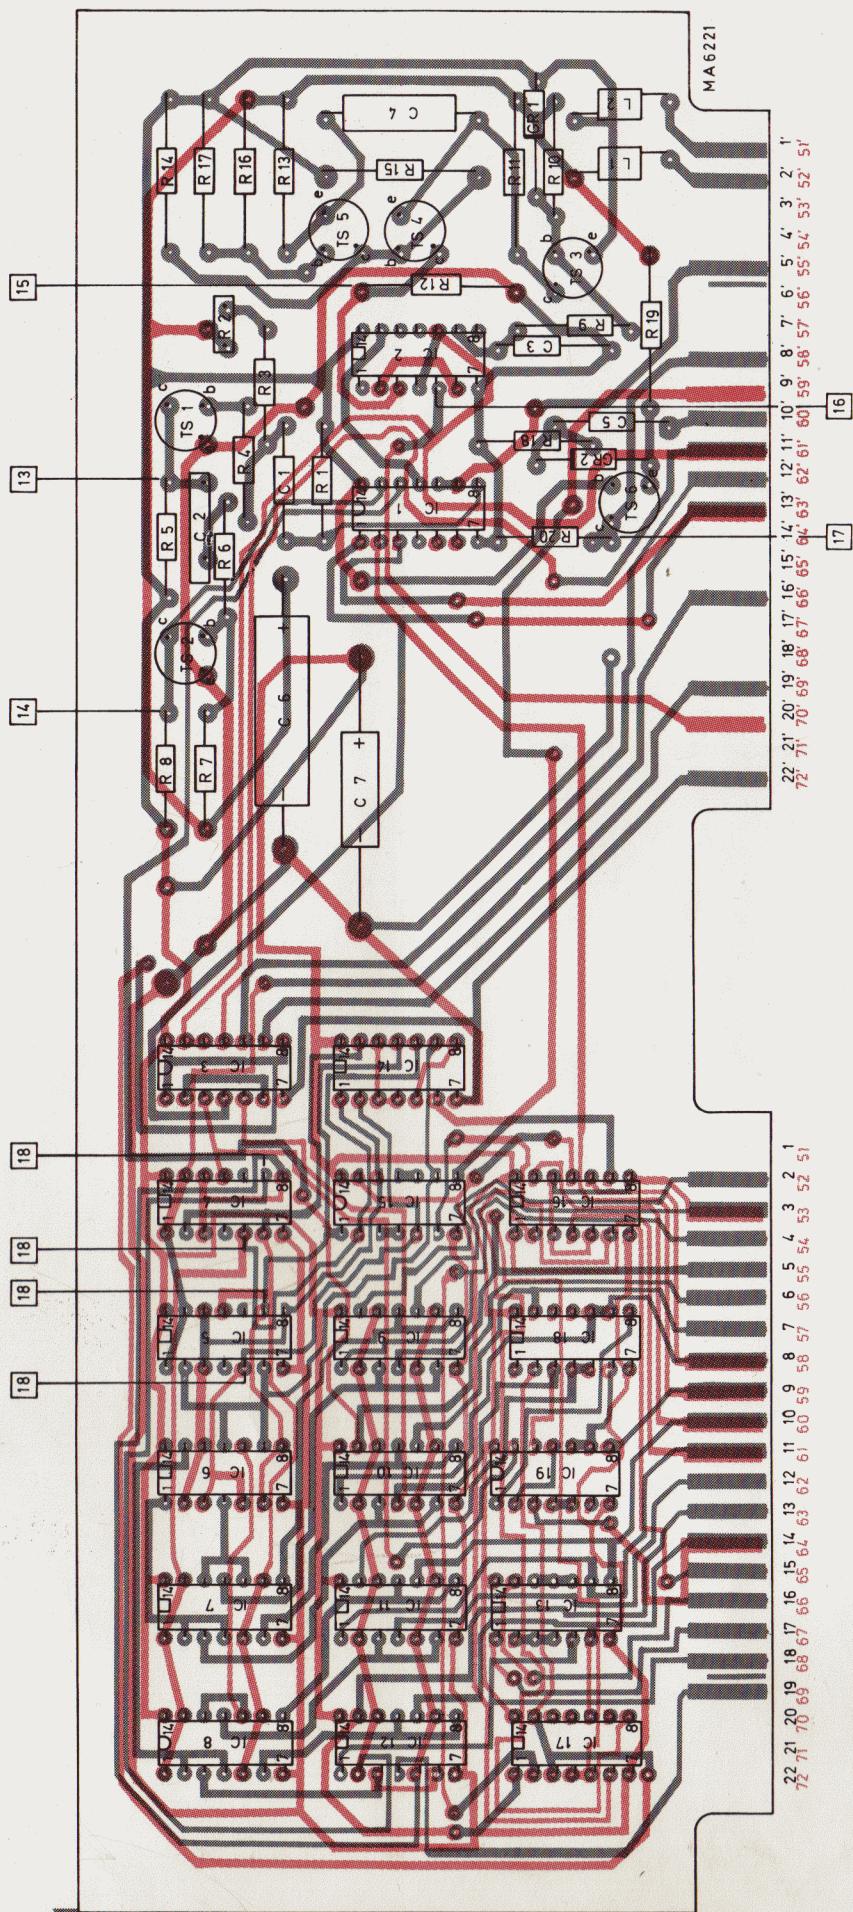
Printed wiring board, vertical decoder, unit 5
